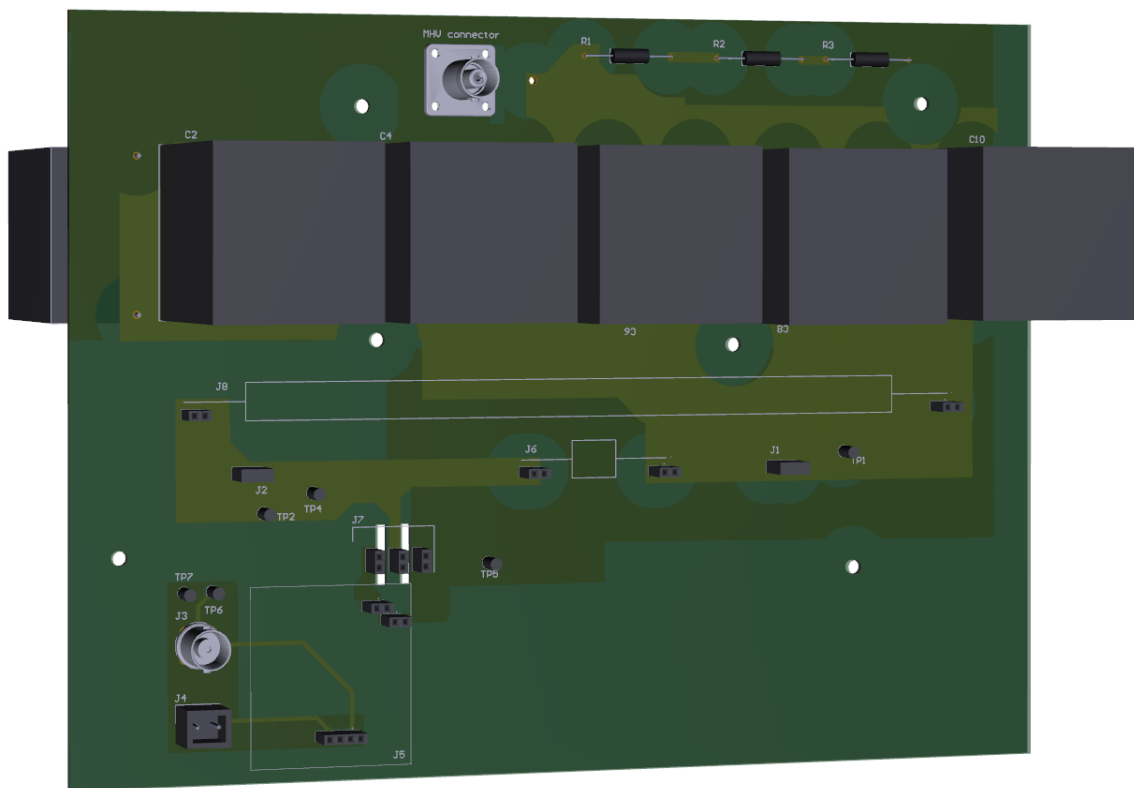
The 3D view of PCB layout for the 3000 V double-pulse board.
